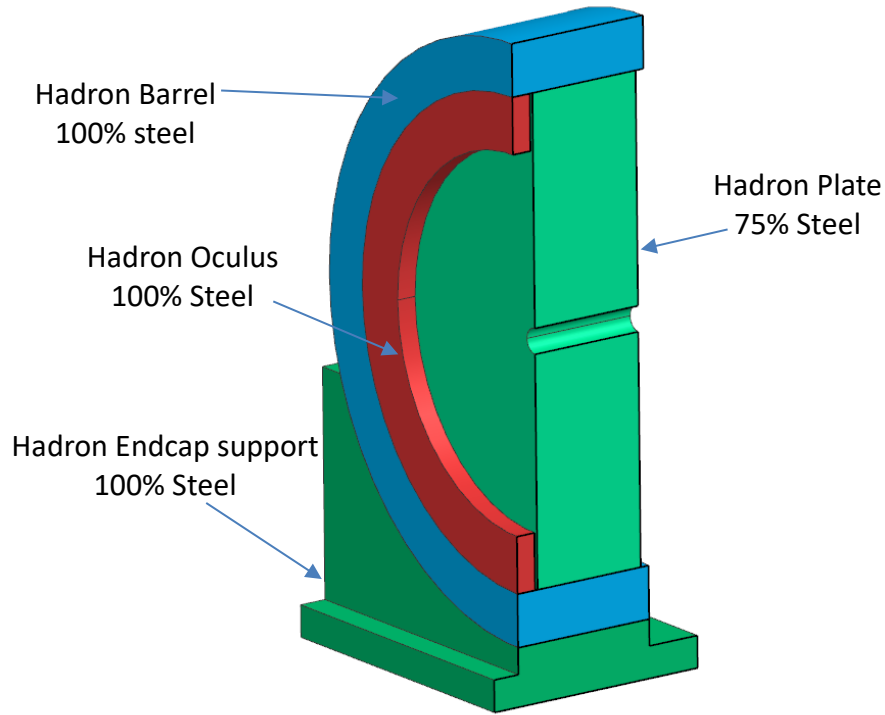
Electromagnetic nomenclature showing the Hadron/Forward Endcap assembly. The hadronic calorimetry were approximated as the Hadron plate, all components were added for magnetic shielding.
